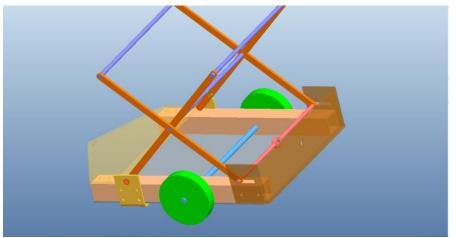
Lifting system up position. On the rear end of the carriage, there is a motor support plate, where the lifting system motor will be fixed.
